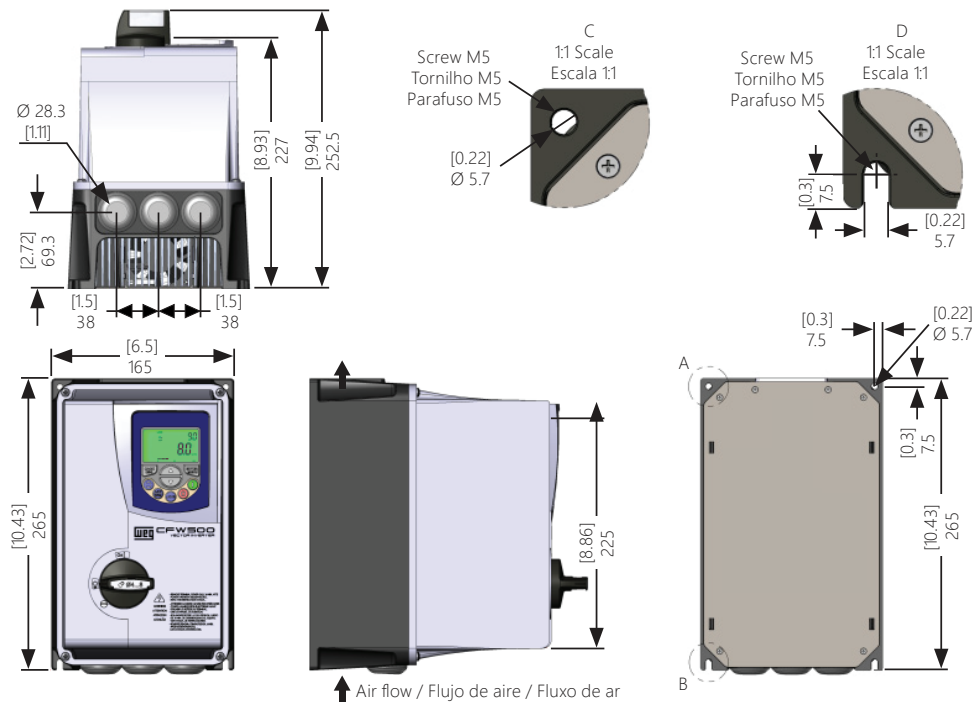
Dimensions of the CFW500 IP66 frame size A
